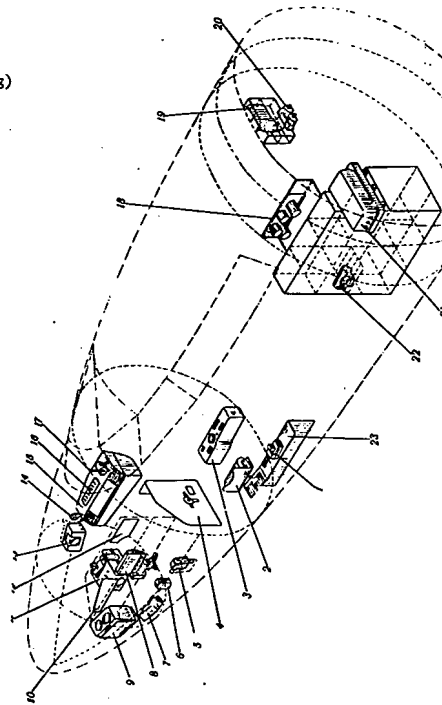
ARRANGEMENT OF BONDING EQUIPMENT IN FRONT PRESSURIZED CABIN
